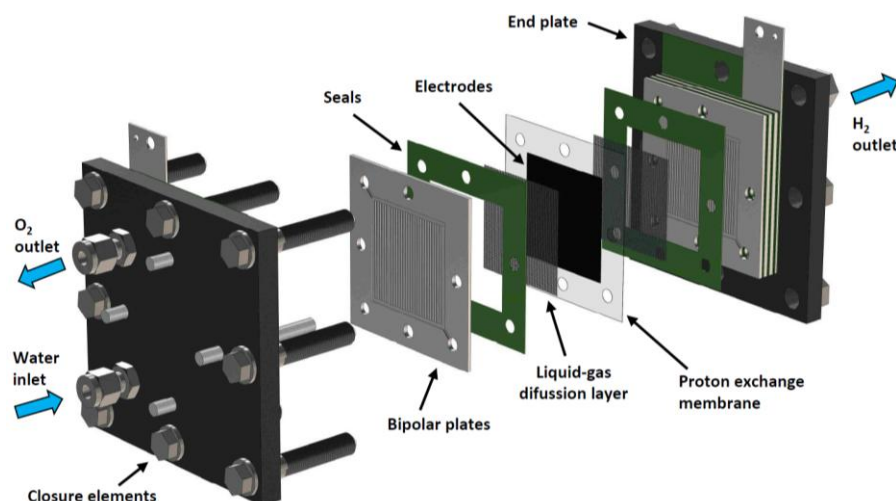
Exploded drawing of a PEM electrolysis stack [16].
